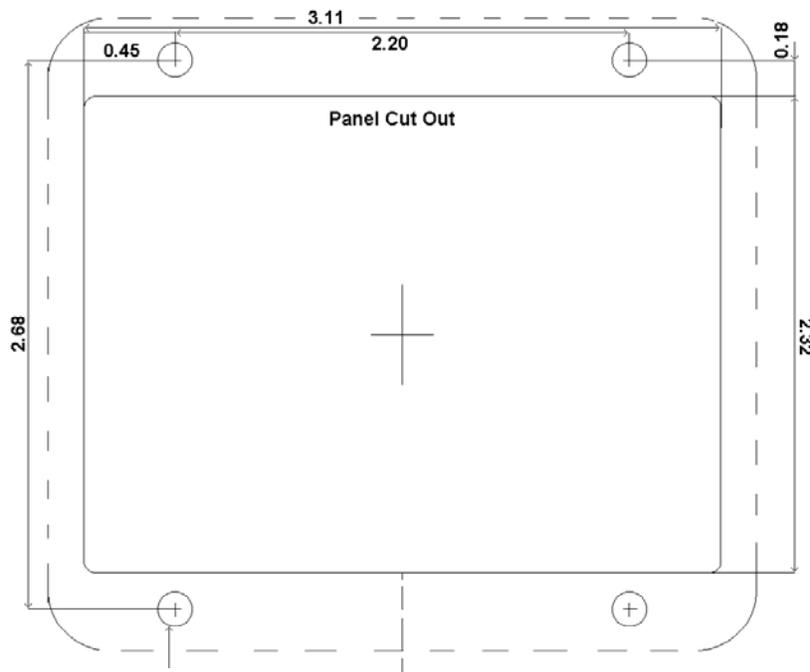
Flush Mount Cutout (dimensions in Inches, not actual size)
